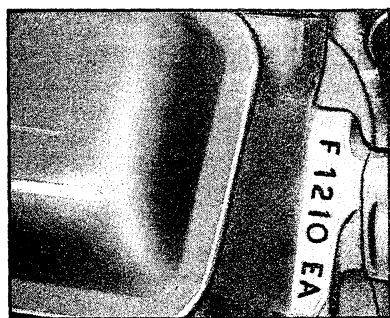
Eight Cylinder Engine Unit Number Located on Pad at Front, Right Hand Side of Cylinder Block
